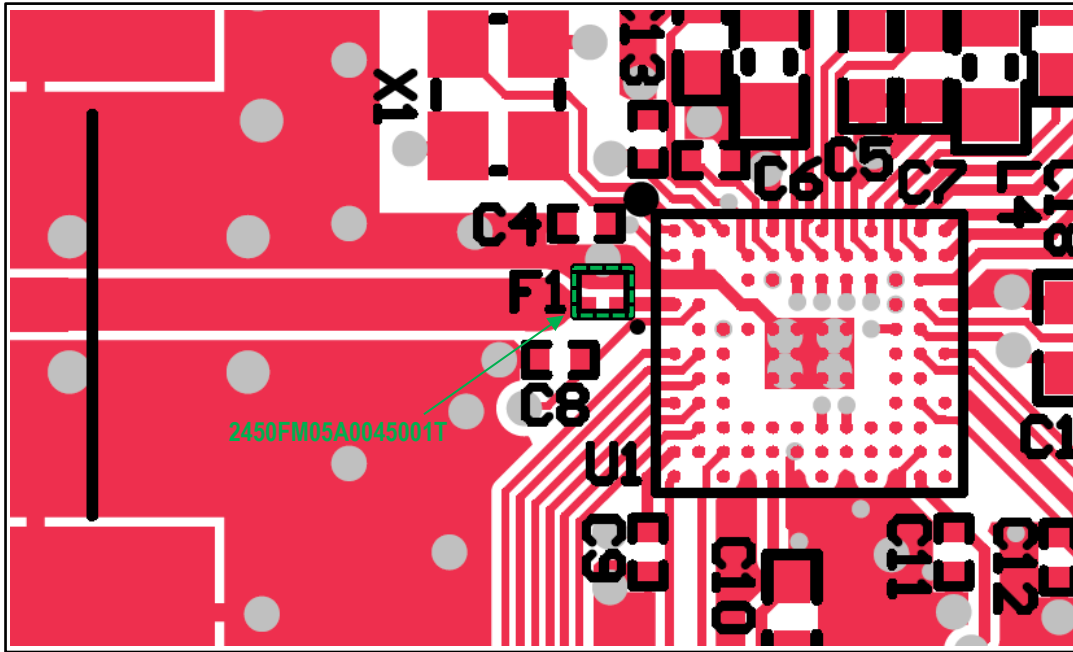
nRF5340-CLAA PCB Layout with Johanson 2450FM05A0045001T
